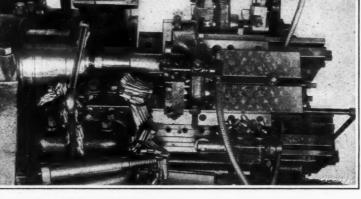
Standard Turner and Flat Forming Tool working together on Shoulder Screw
